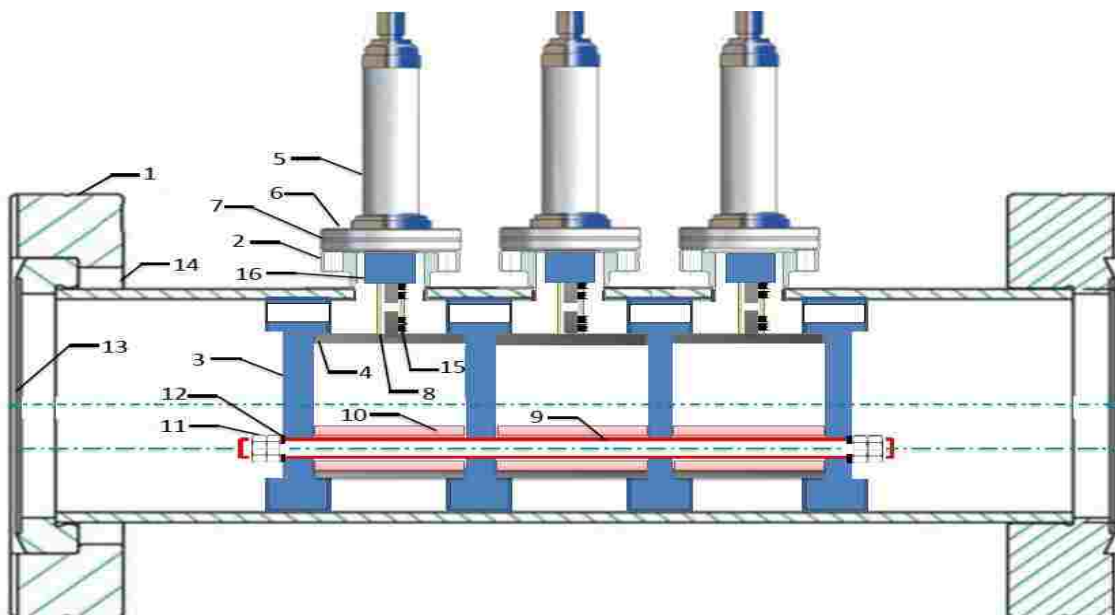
Design of the einzel and its components. 1. CF Full Nipple; 2. 1-1/3" OD CF Flanges; 3. Ceramic spacer; 4. 304 Stainless steel 2"OD seamless tubes; 5. Power Feedthroughs CF Flanged 20 000V; 6. 8-32x3/4" Bolt & Nut Sets; 7. Annealed Copper Gaskets 1-1/3" CF; 8. Barrel Connector for 0,120" wire; 9. UNC 1/4" stainless steel connecting rods; 10. Ceramic isolating tubes; 11. Stainless steel hex nuts; 12. Stainless steel washers; 13. Annealed copper gaskets 6"CF; 14. Stainless steel hex bolt/plate -nut sets; 15. Socket head screws 4-40; 16. Isolating tube.
